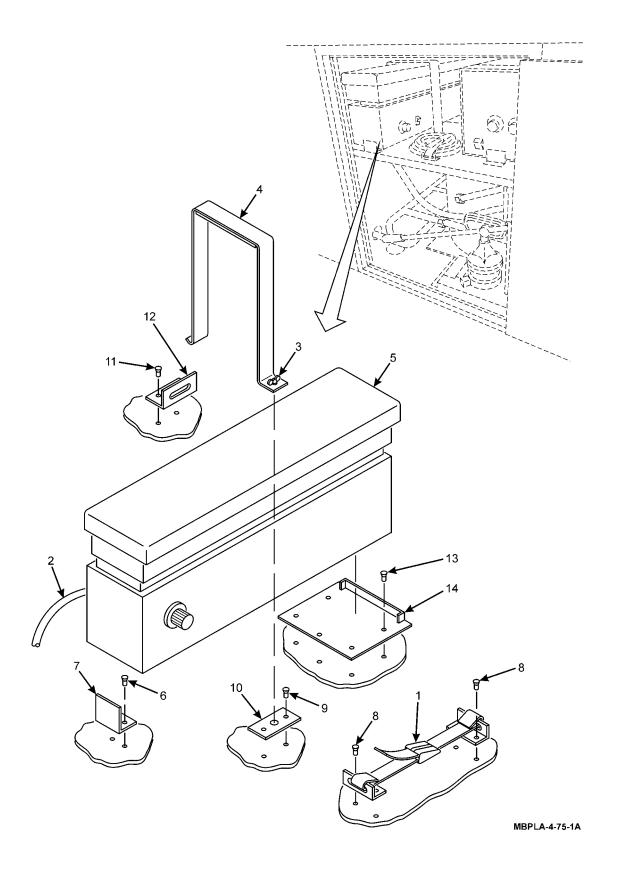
Hot Plate, Water Bath, Grease Working Machine, and Brackets (Sheet 1 of 3)
